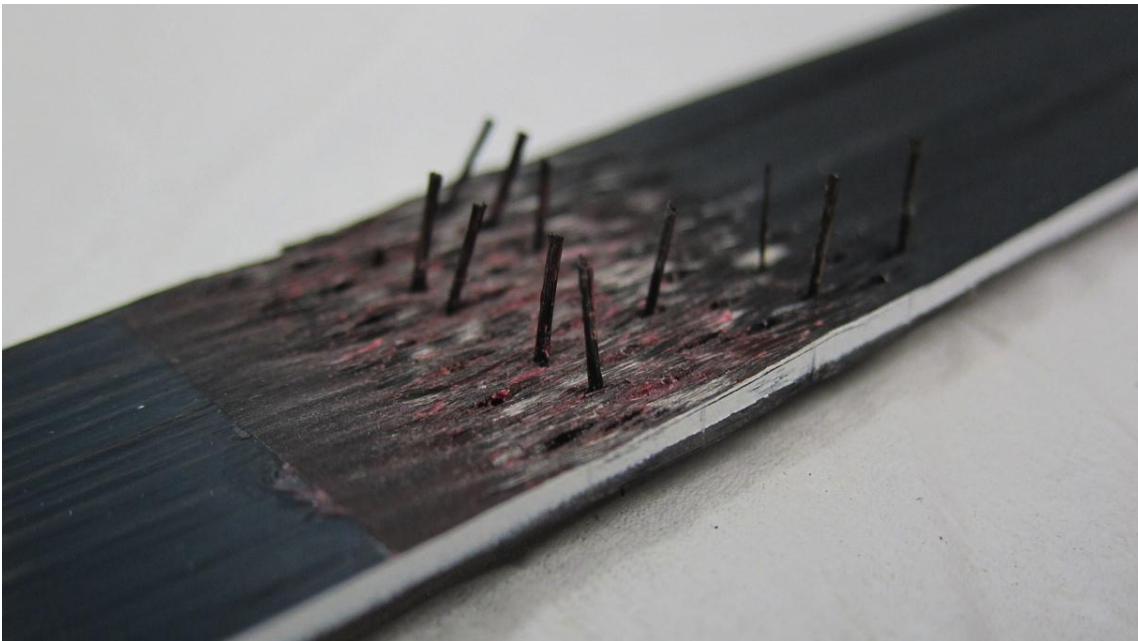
Fracture surface of specimen 11B indicating the presence of self-healing resin on fracture plane and carbon Z-pins
